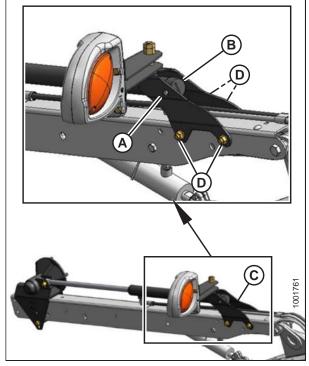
Left Reel Arm Cylinder in Forward Position
